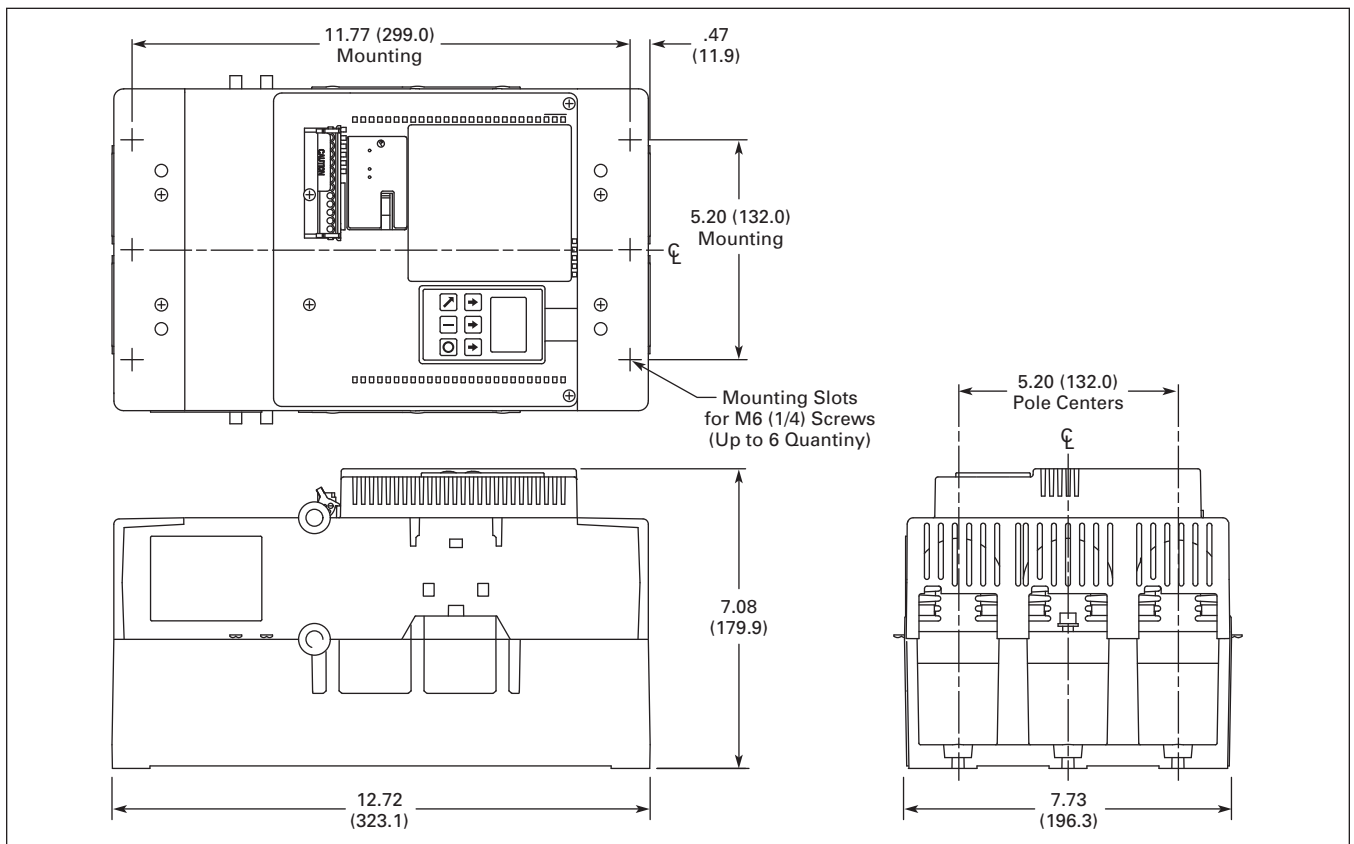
U-Frame (200 mm) S801 Approximate Dimensions in Inches (mm)
